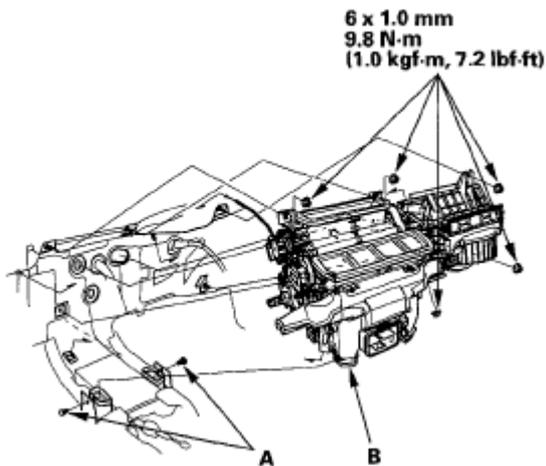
Identifying Mounting Nuts, Blower-Heater Unit And Clips
